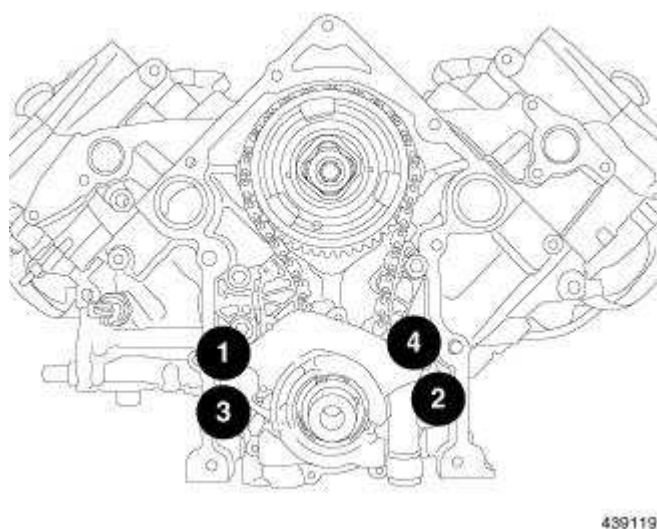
Oil Pump Retaining Bolt Tightening Sequence
